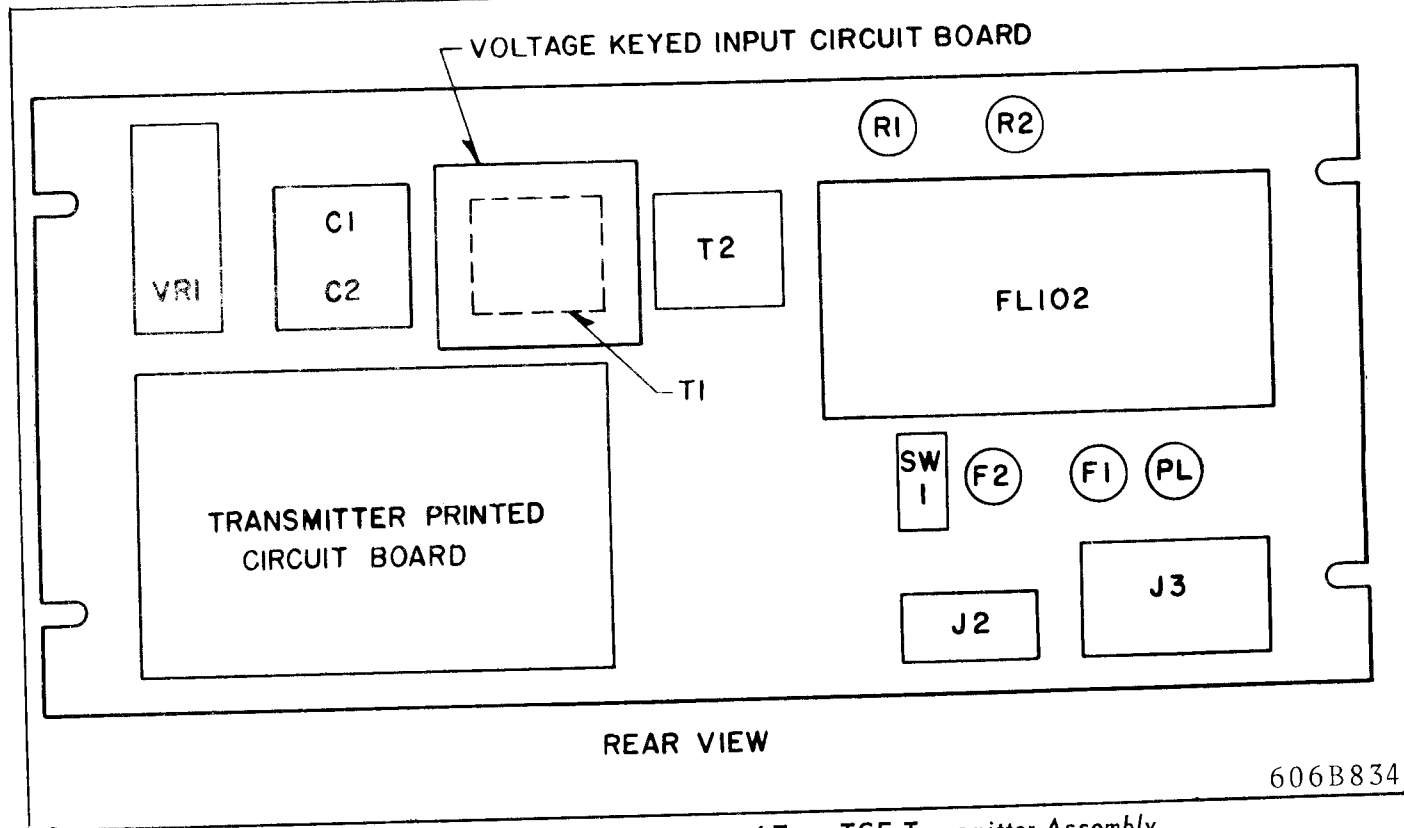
Component Locations of Type TCF Transmitter Assembly.
